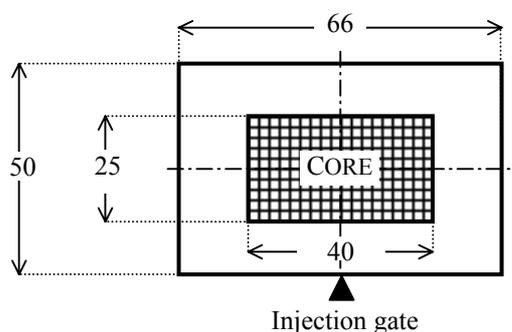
The geometry of the mould cavity. Dimensions in millimetres.
